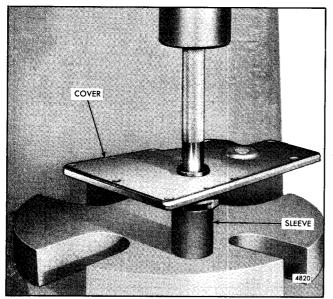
Removing Stop Lever Shaft Bushing from Governor Cover using Tool J 21967-01
